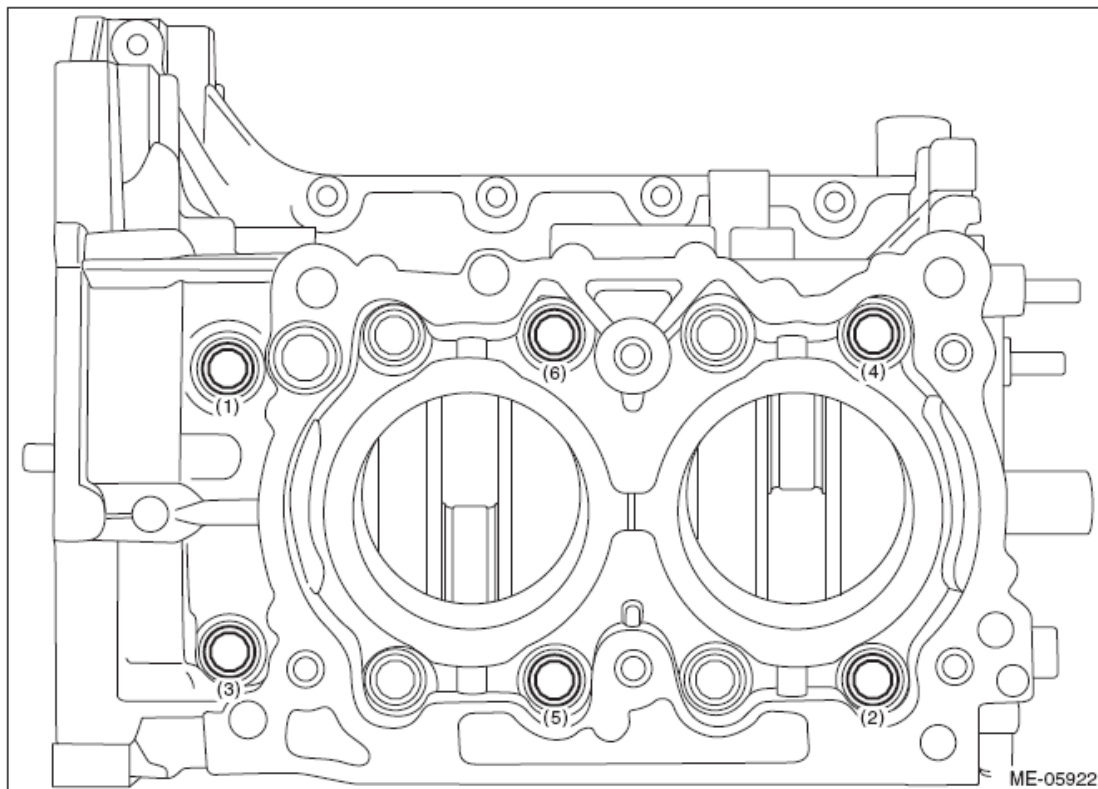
Identifying Cylinder Block Mounting Bolts Loosening Sequence
